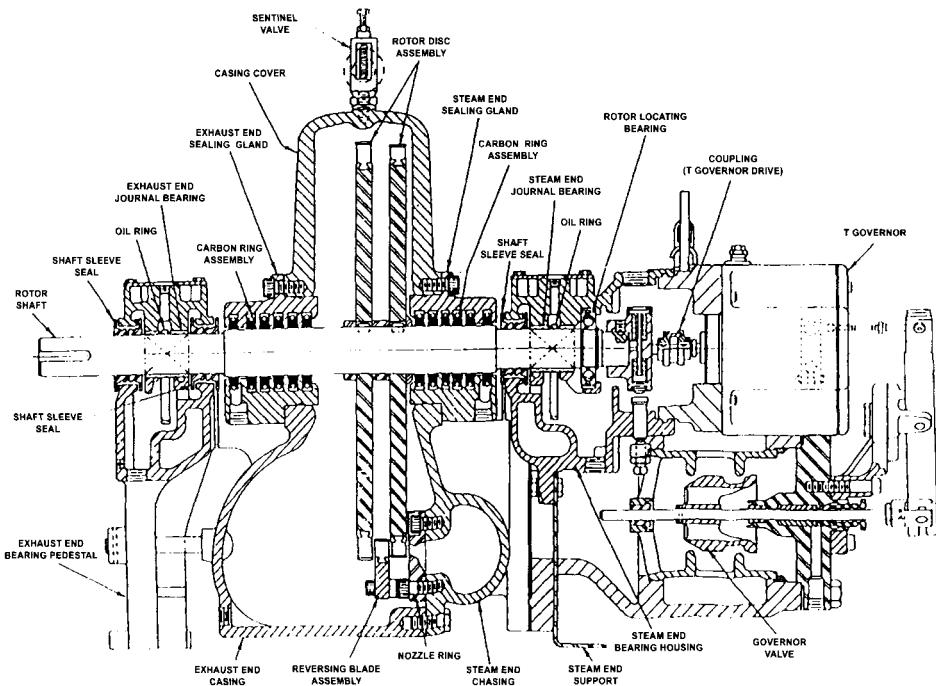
Typical general purpose (pump drive) turbine assembly (Courtesy of Elliott Company)
